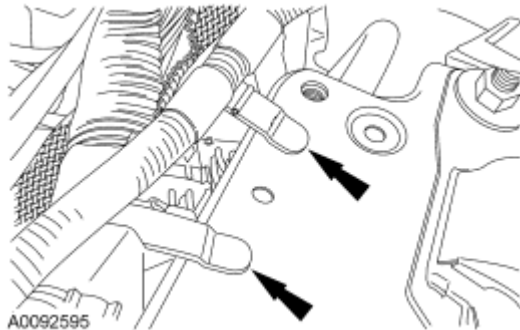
Locating Positive Battery Cable Pin-Type Retainers
